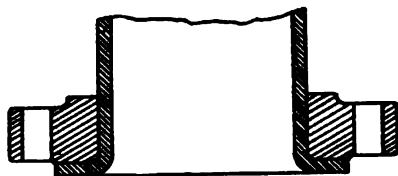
A GOOD FORM FOR A FLANGED JOINT
